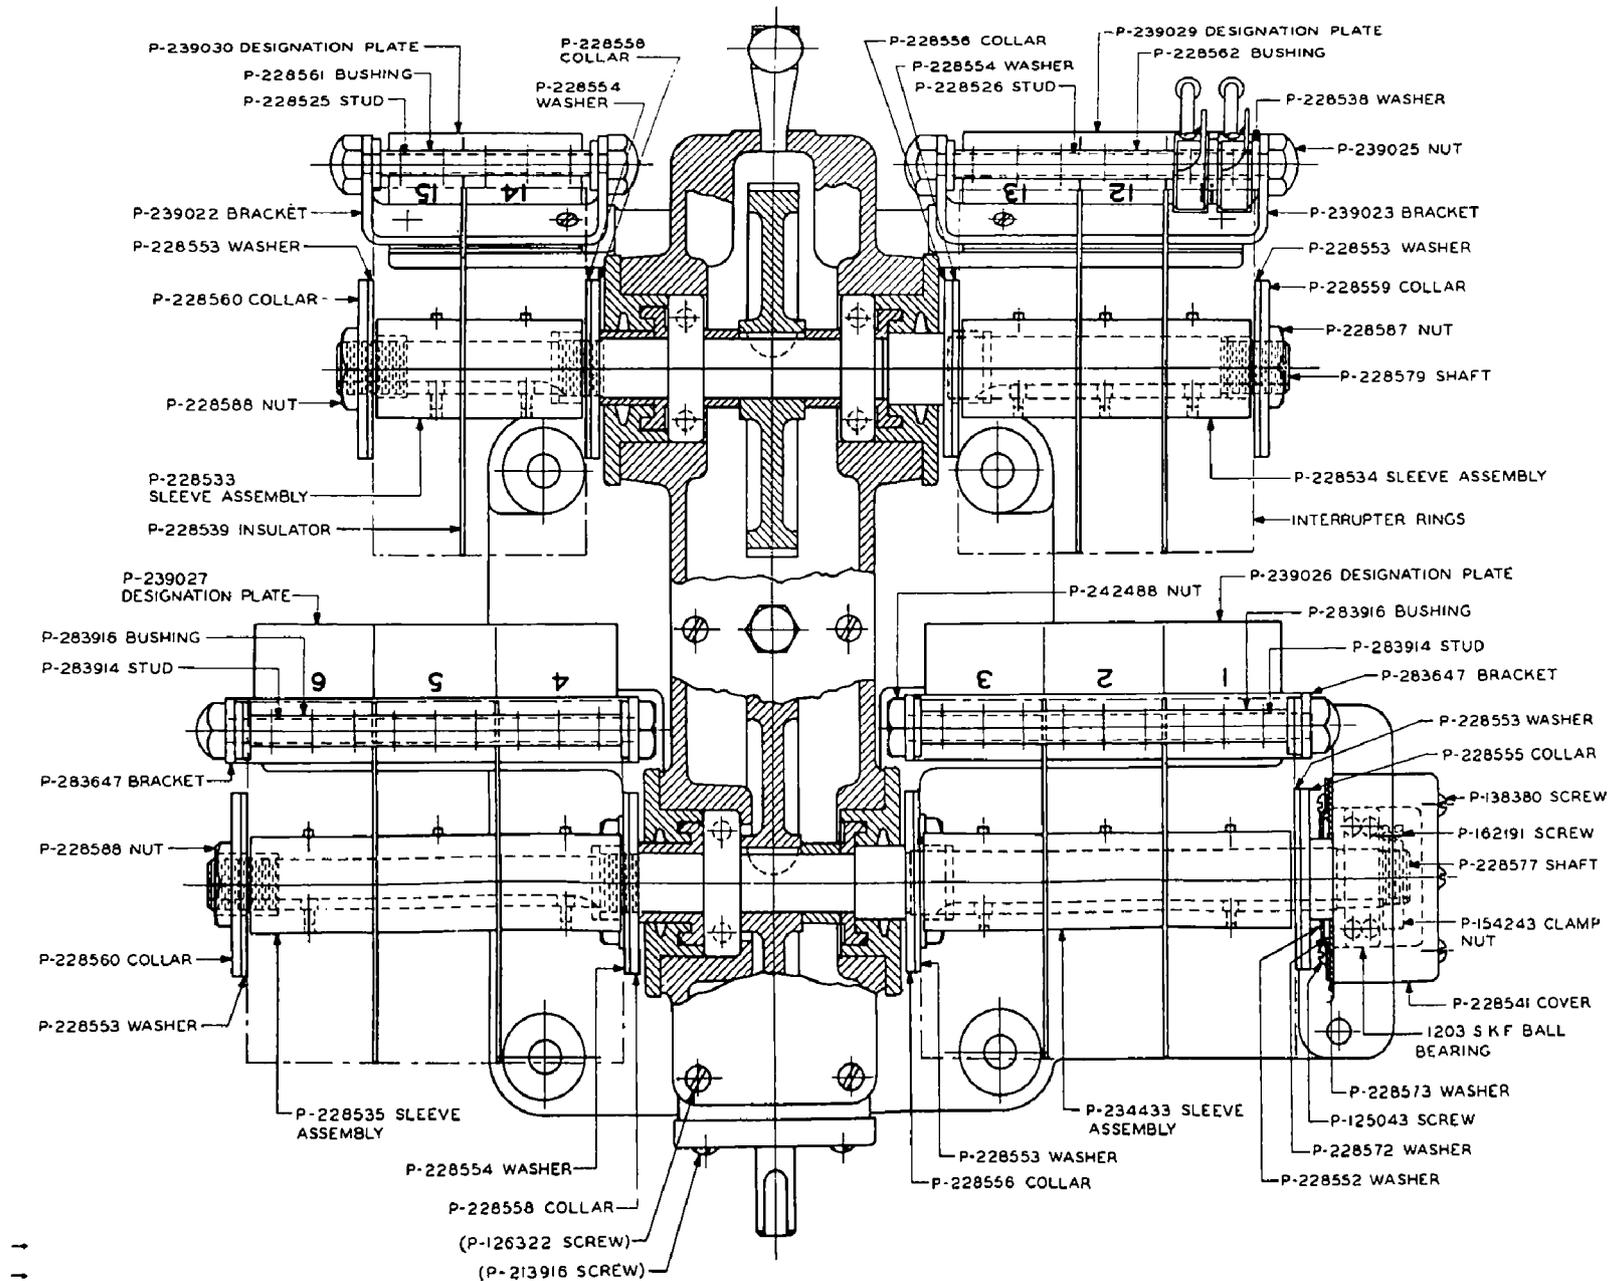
2B Interrupter Mounting—Top View (For Side View See Fig. 10)
